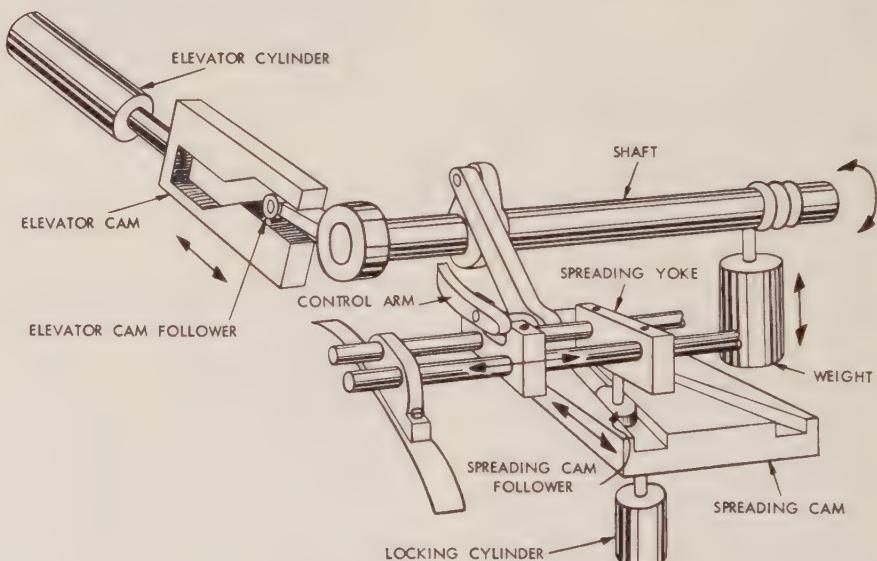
The basic design of the mechanism for pre-stressing the control arms is illustrated in this schematic drawing. A constant, uniform pre-stressing force is attained by utilizing a suspended weight as the stress force. (Inaccuracies due to friction losses are negligible.) To start the pre-stressing operation, with a control arm properly located in the fixture, the elevator cylinder is actuated to move the elevator cam forward. With the elevator cam forward, the elevator cam follower moves first to the lower and then the free position, after the spreading force applied to the control arm equals the weight. When viewed from the cam follower end of the shaft, counterclockwise rotation of the shaft activates the spreading cam which, in turn, moves the spreading yokes outward. The only variables in the linkage that could affect uniformity of stress are the spreading cam and follower contact friction. After the spreading cam plate has completed its movement, the locking cylinder is actuated to lock the spreading cam in its full-stress position. When the stressing action is reversed, the locking and elevator cylinders return to their normal positions, thereby raising the weight. The next cycle is then ready to start. This diagram shows only the left spreading-yoke assembly.
